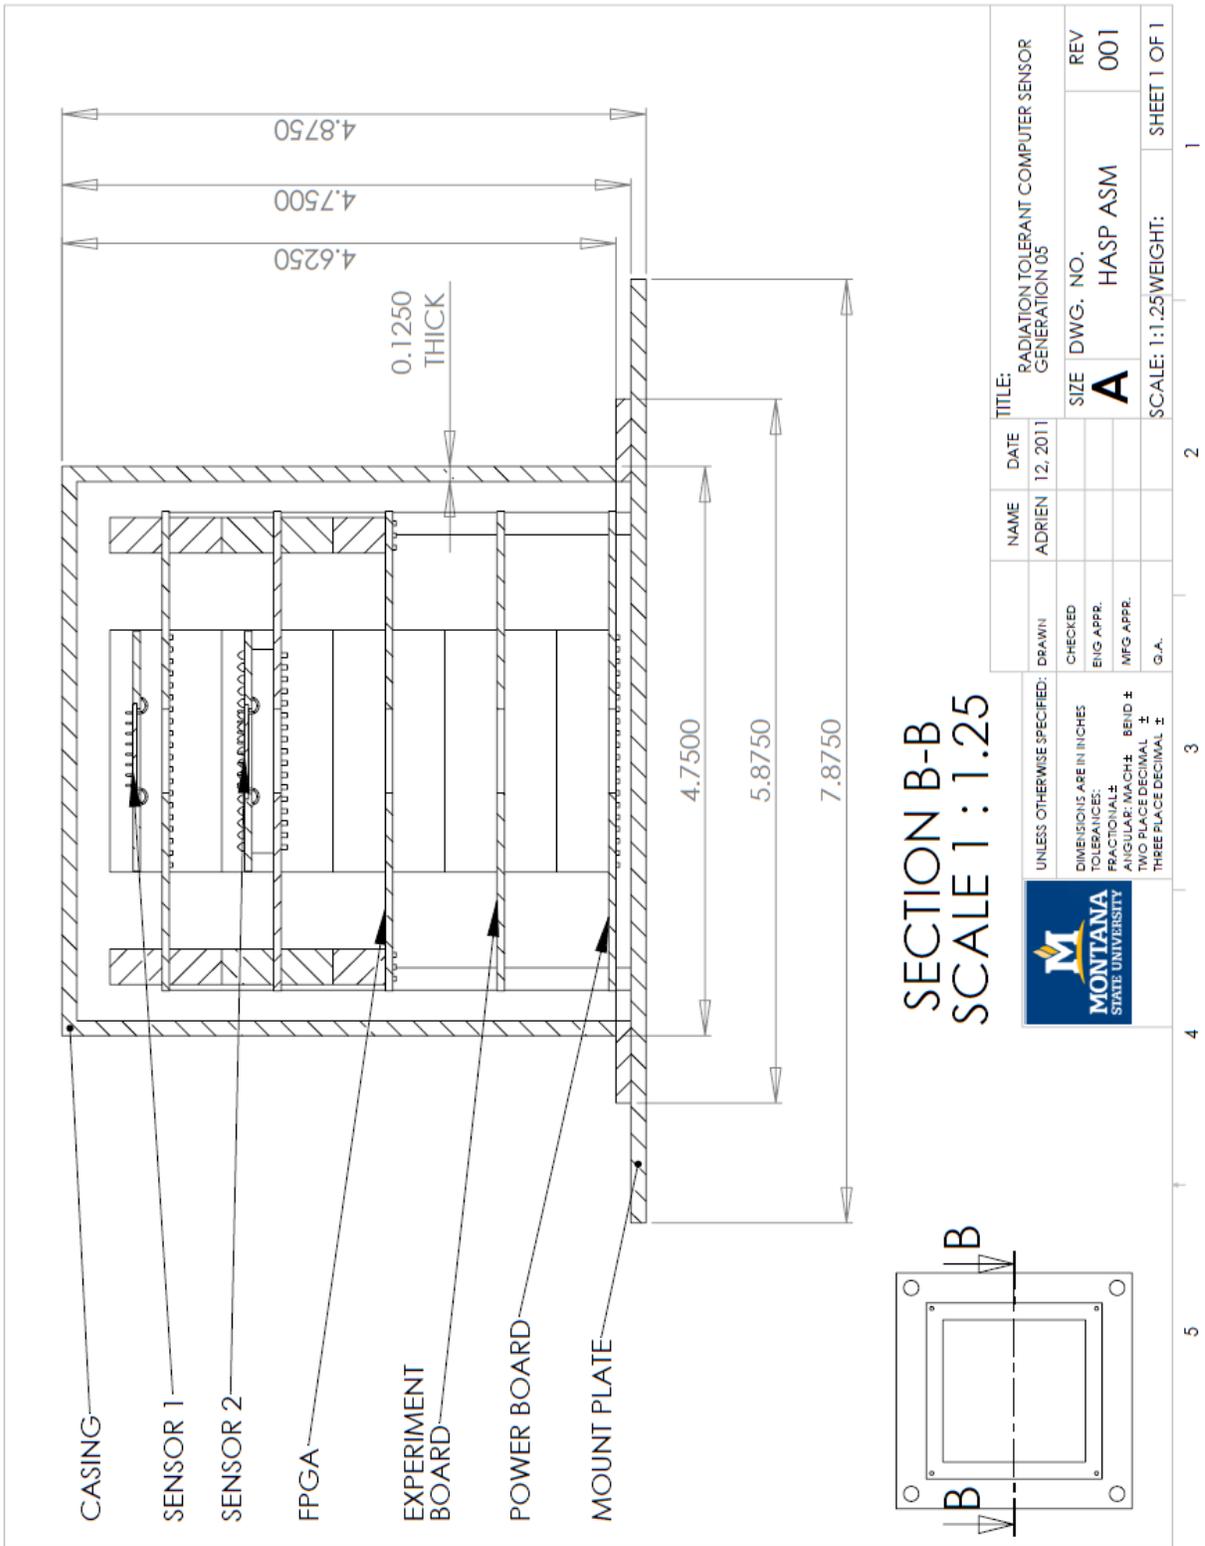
Side view of payload electronics stack. Dimensions are in inches.
